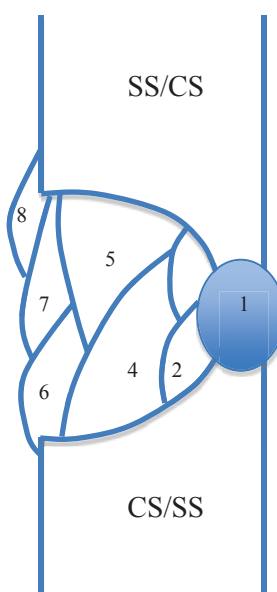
, Schematic sketch of how sample 4 and 6 (without gap) are welded.
